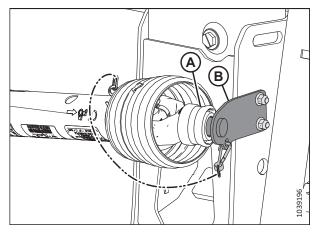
Driveline in Storage Position – Driveline MACB7038 or MACB7039
